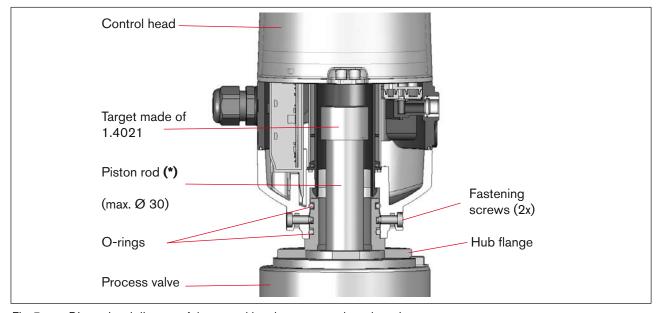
Dimensional diagram of the control head - process valve adaptation
